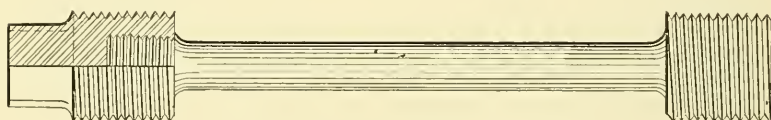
FLEXIBLE SPRING STEEL STAY BOLT
